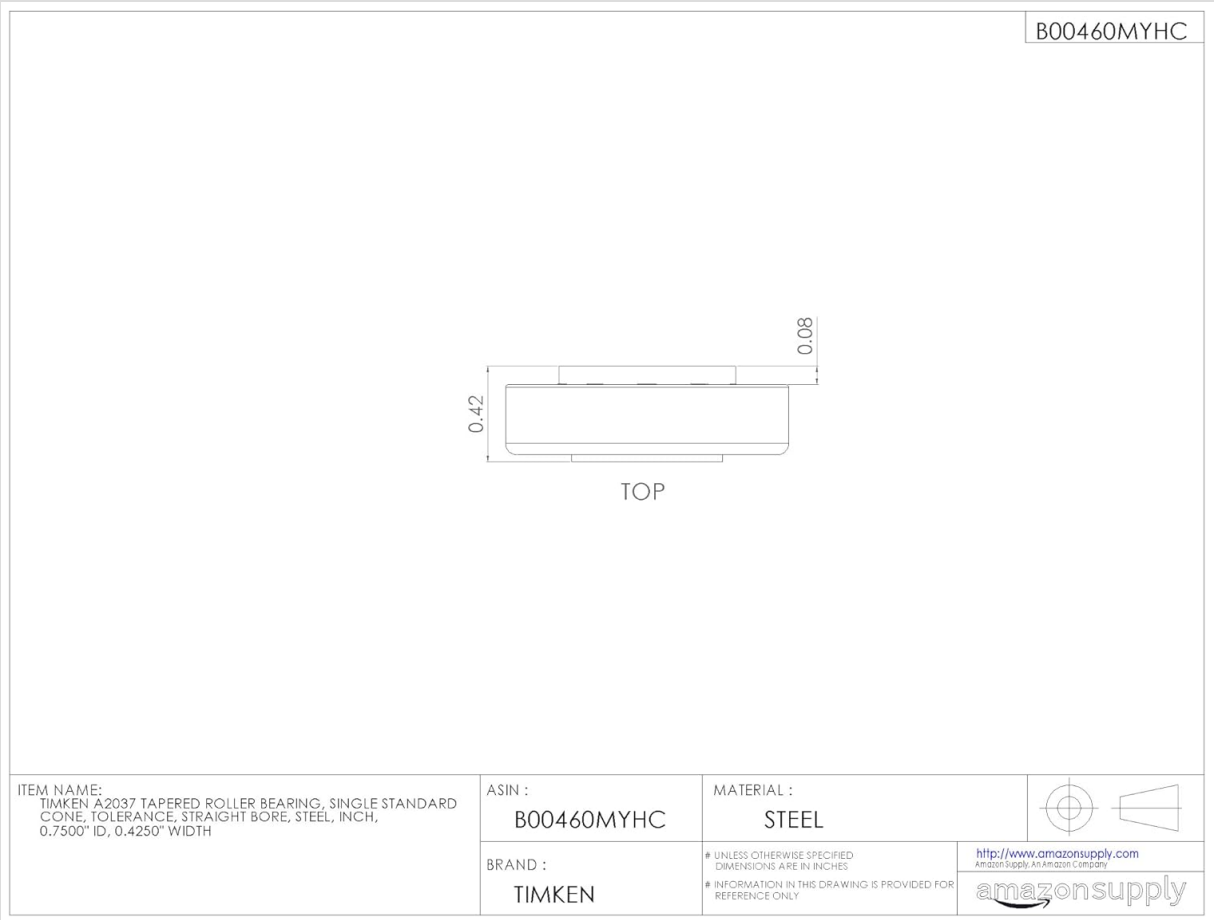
Top view technical drawing of the Timken A2037 Tapered Roller Bearing Cone, showing its diameter and overall dimensions.
